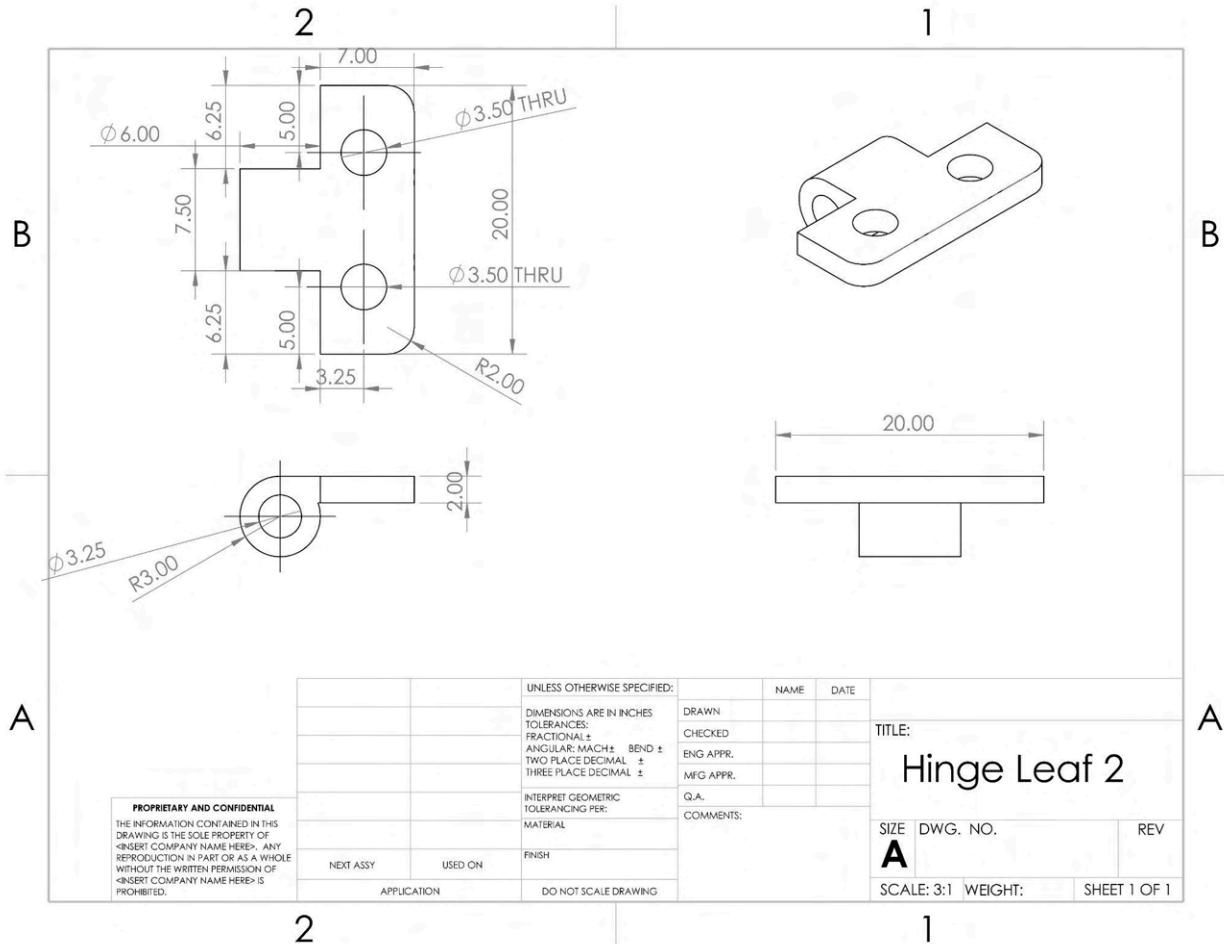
Hinge Leaf 2. Dimensions in mm. (added dimensions)
